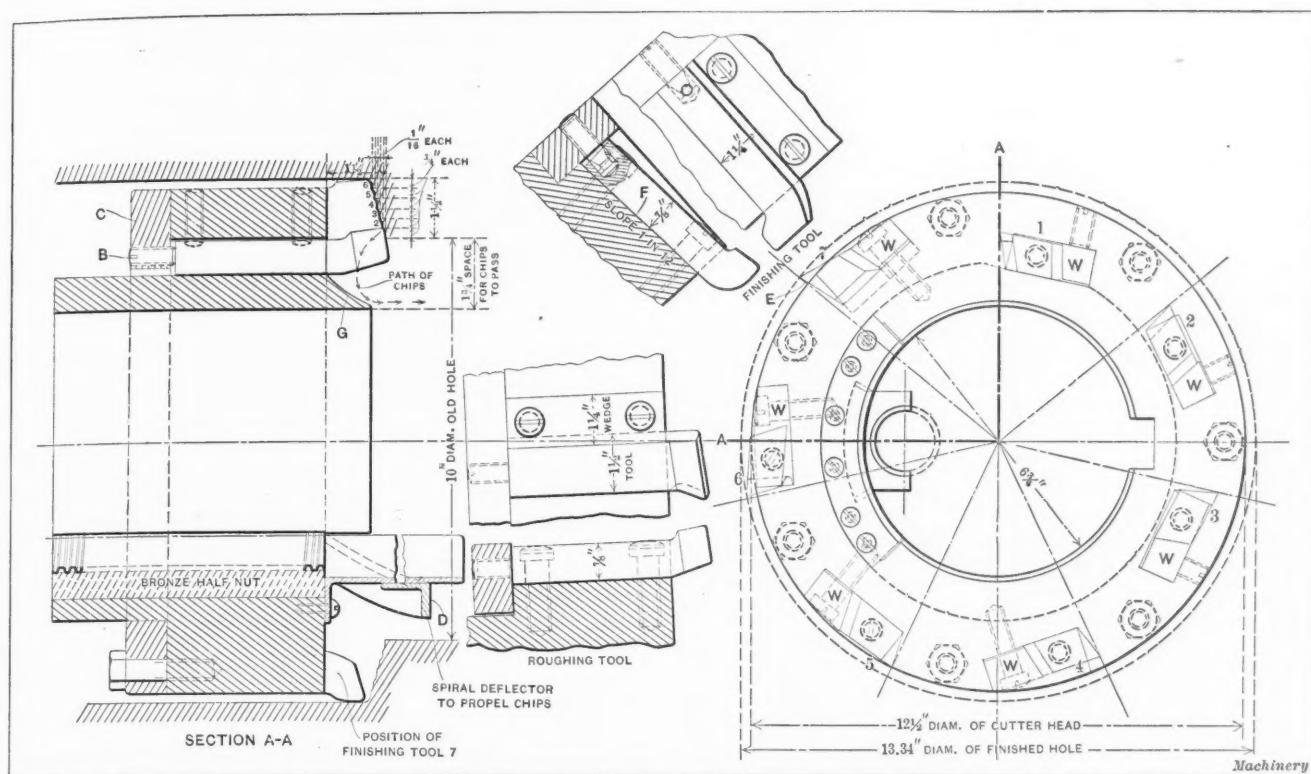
Seven-tool Cutter-head used on Boring Machine
